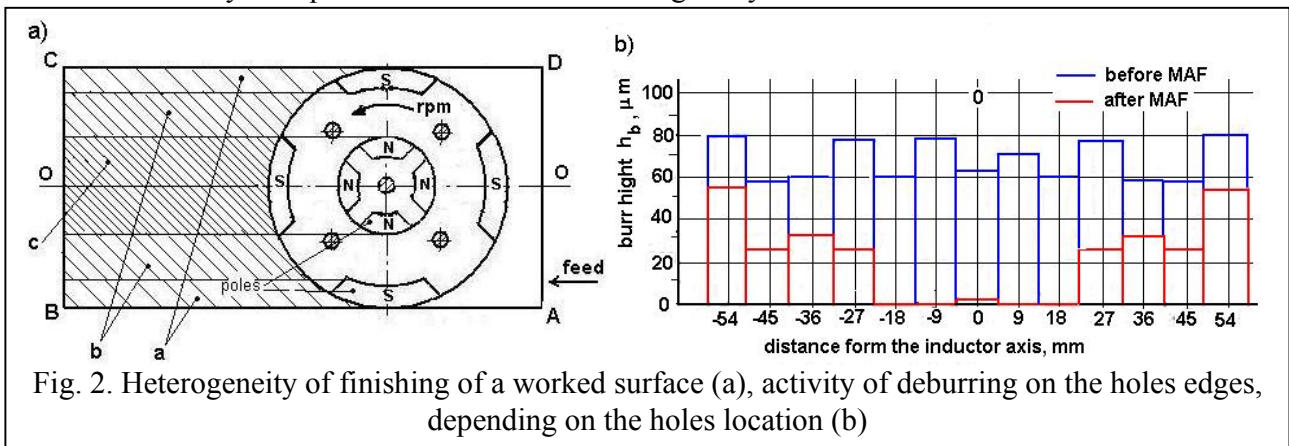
Heterogeneity of finishing of a worked surface (a), activity of deburring on the holes edges, depending on the holes location (b)
